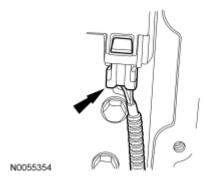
Identifying TSS Sensor Electrical Connector Courtesy of FORD MOTOR CO.
